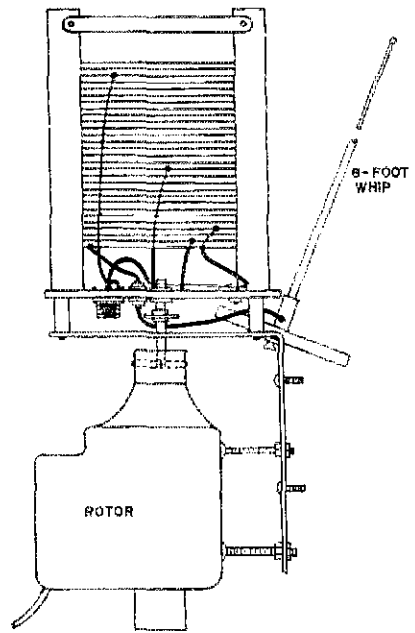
Here is a simplified side view of the switch, inductor, and TV rotor.
